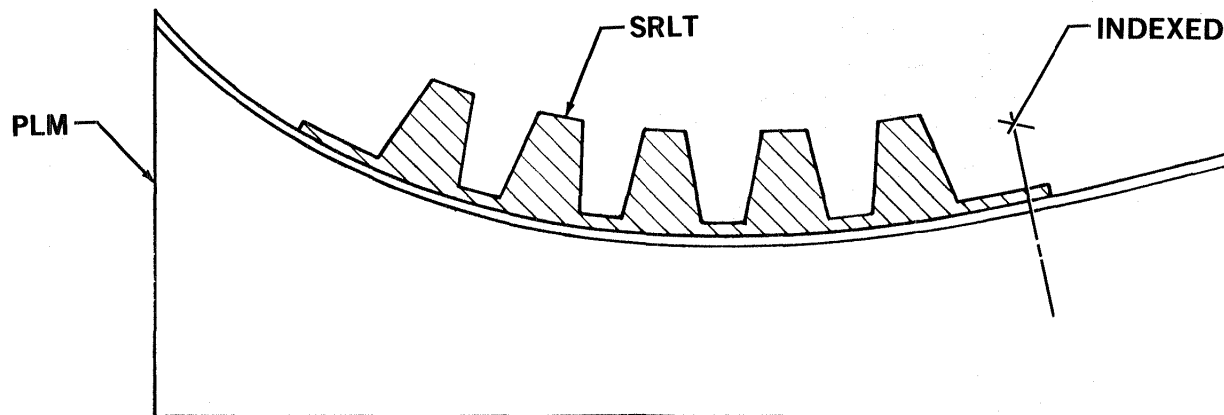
A. BASIC SILICONE RUBBER TOOL
